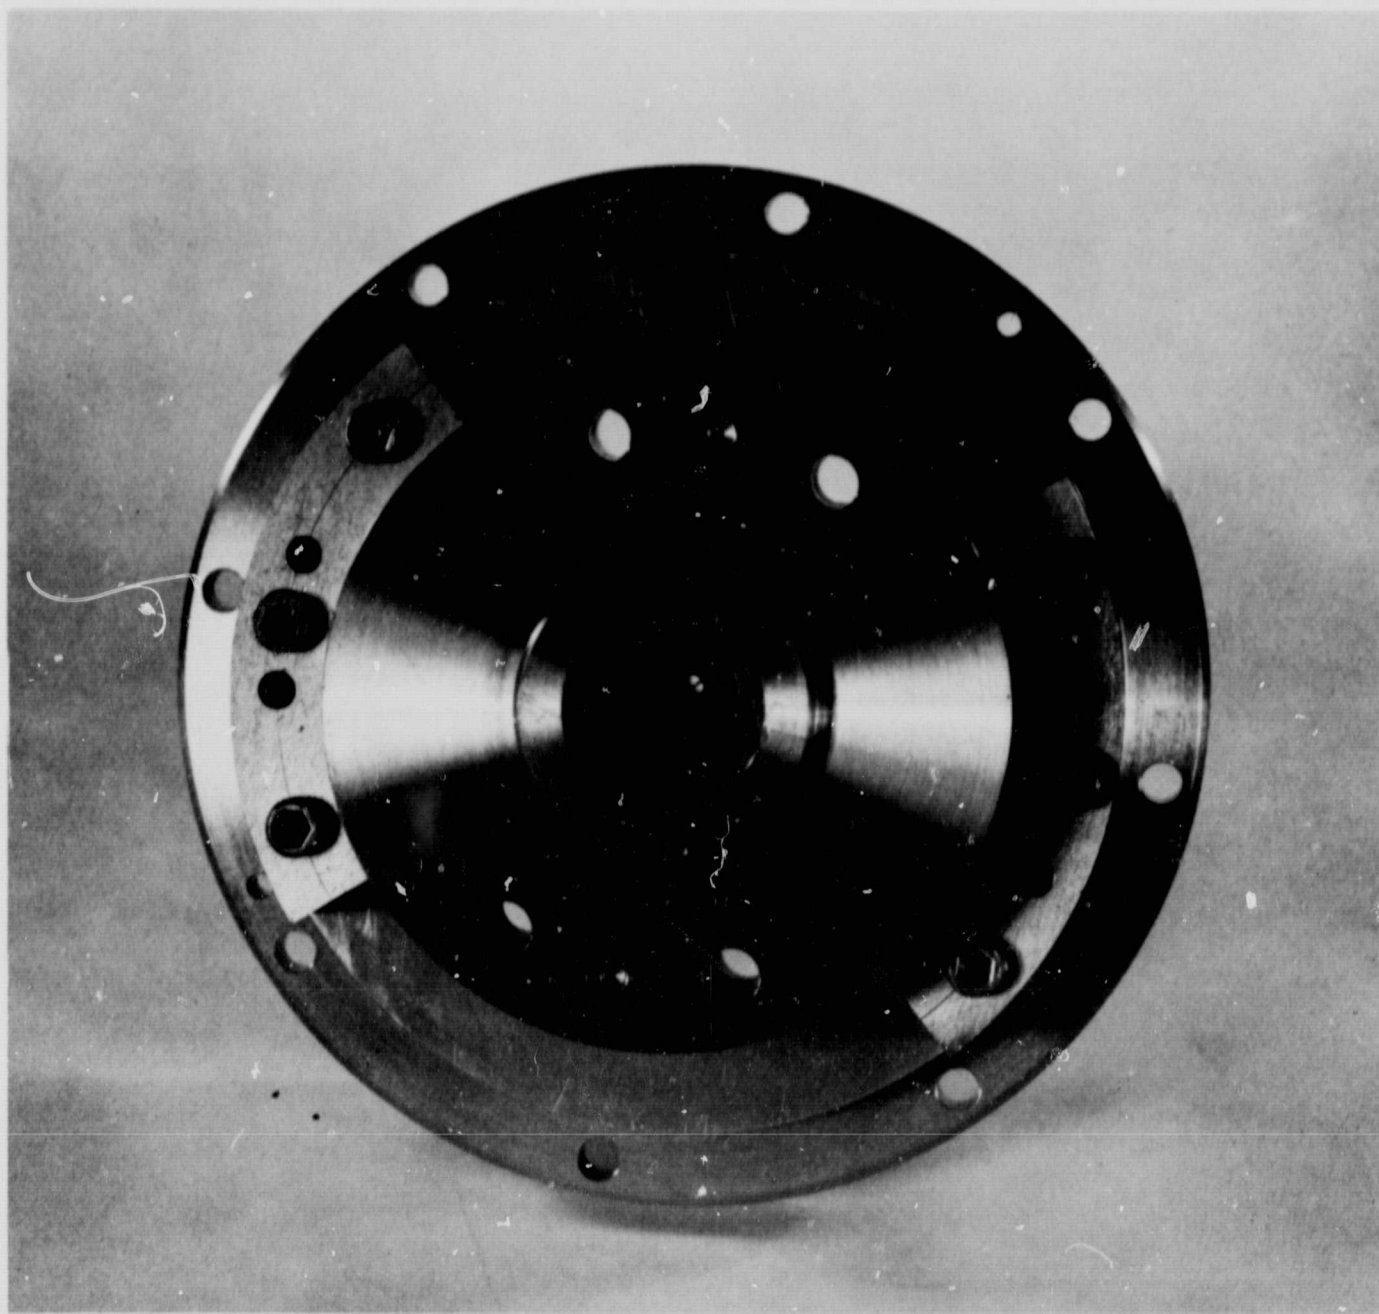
Full Scale View of Yaw Axis Pivot Assembly Showing Flexure Bearing
